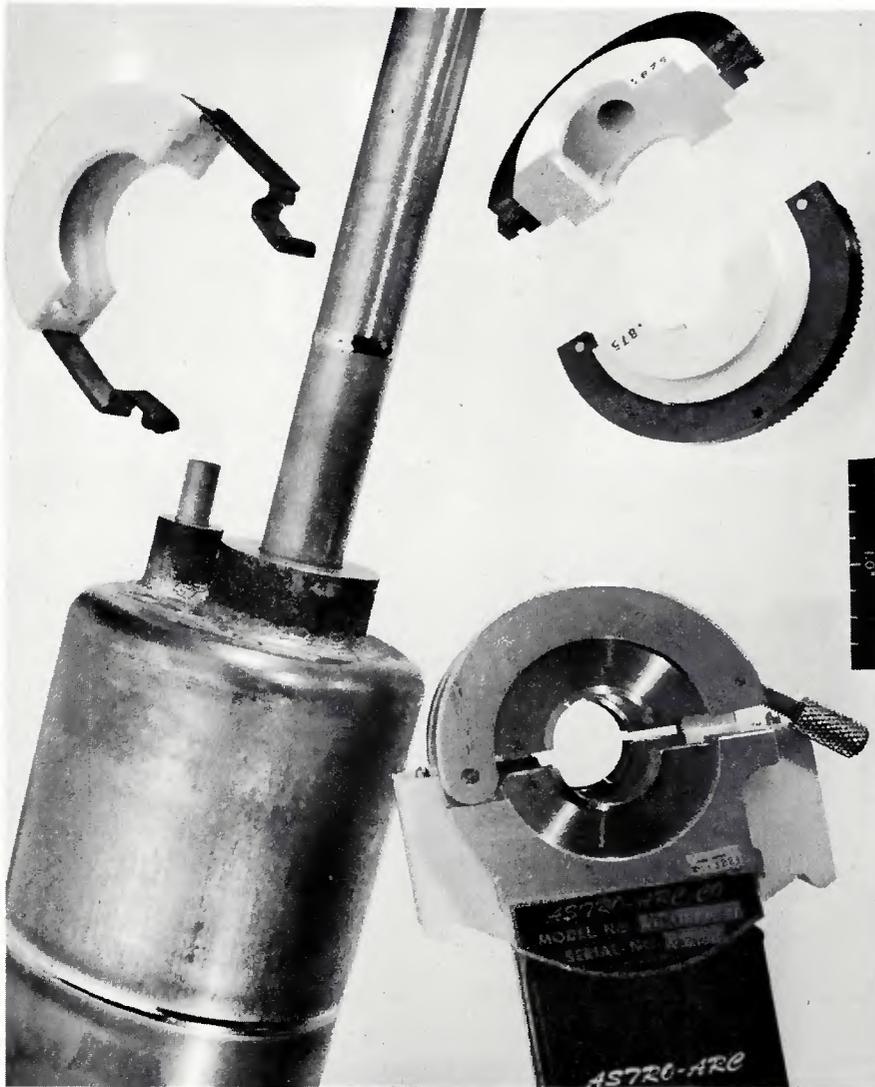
Orbiting-arc weld head and 0.875 in. diam tube-to-tube weld
